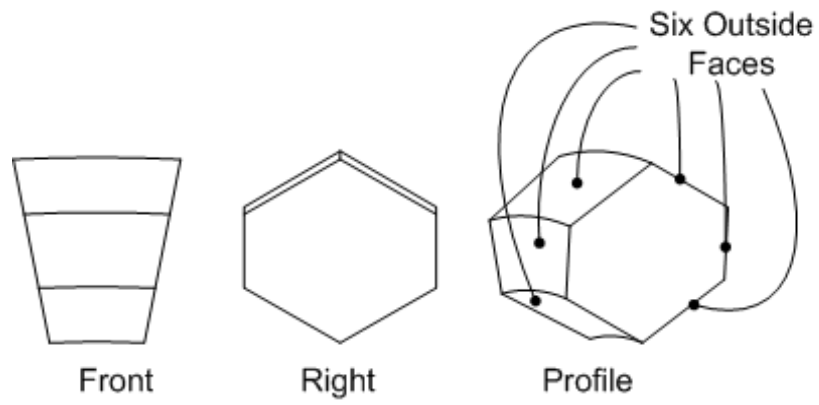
Rotor Tooth with Six Outside Faces - Toroid Segment
